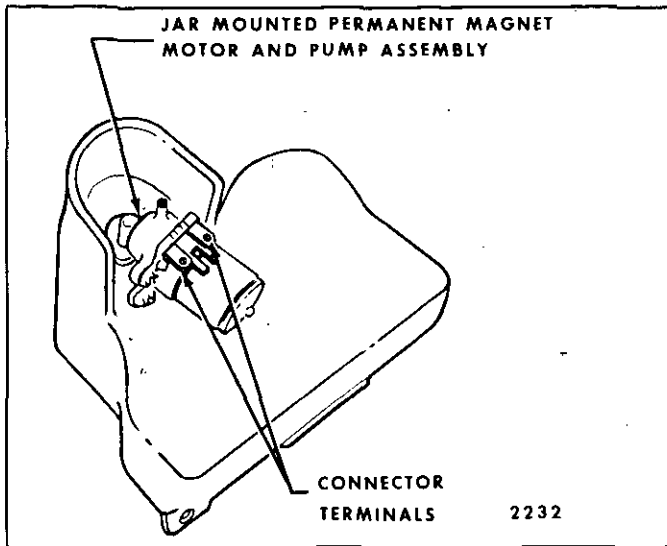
E2-7 Jar Mounted PM Motor and Washer Pump Assembly
